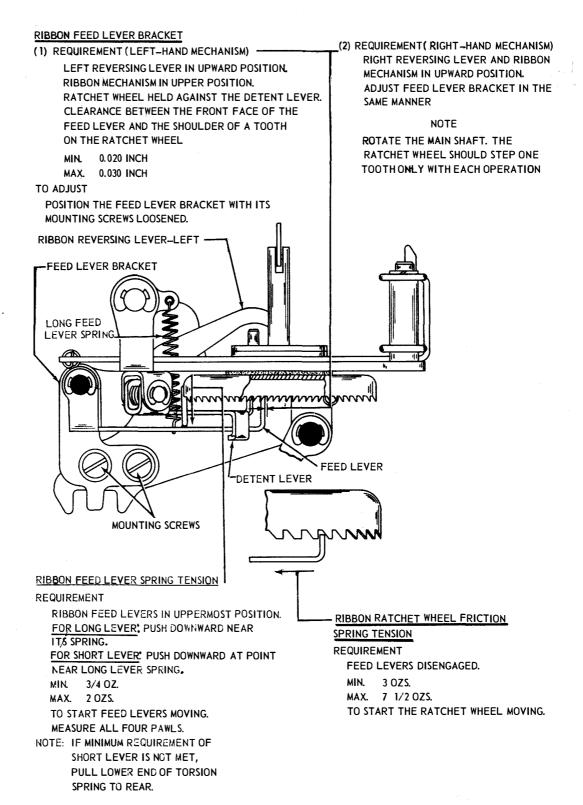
TYPING UNIT, RIBBON FEED MECHANISM, LEFT SIDE VIEW
